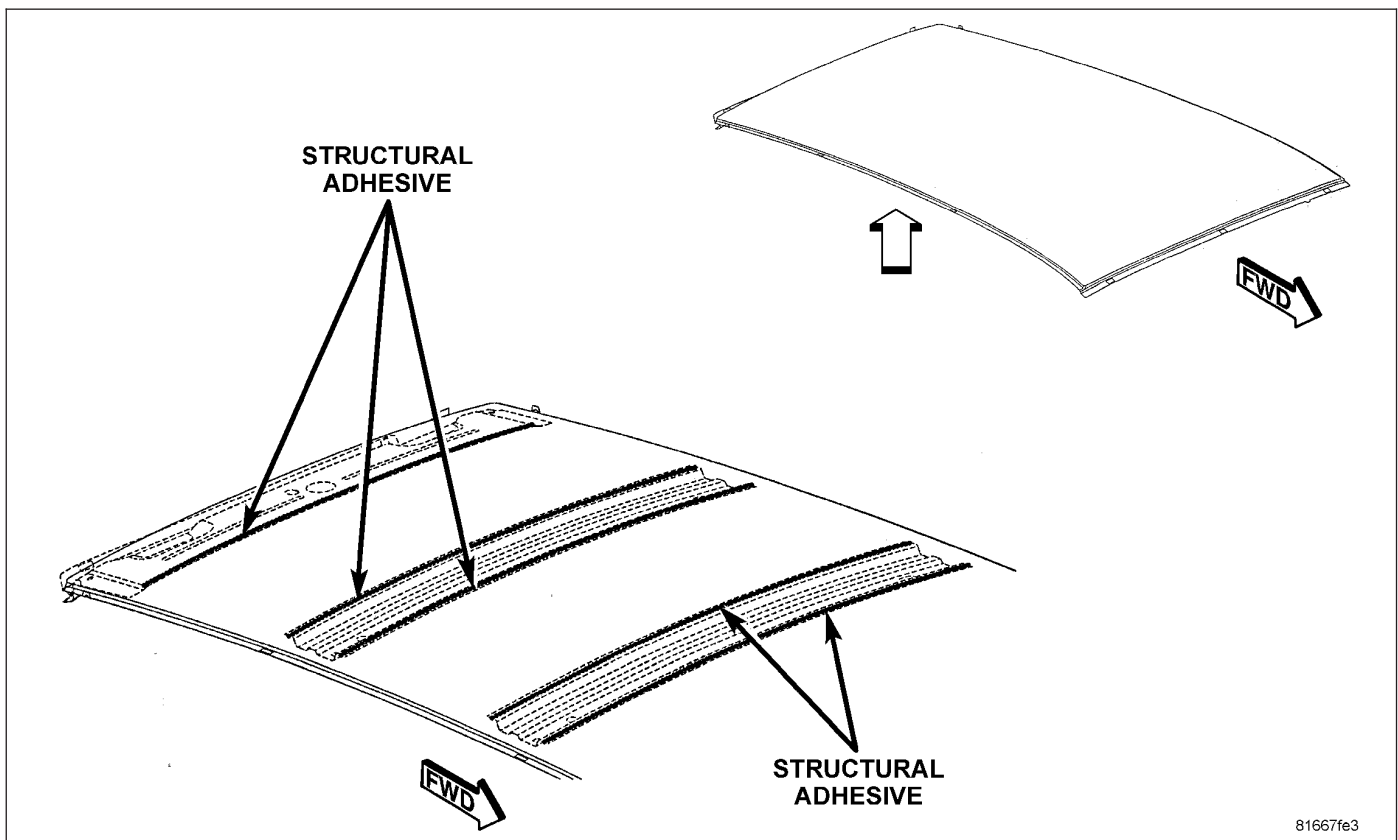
ROOF WITHOUT SUNROOF (2 OF 2)
